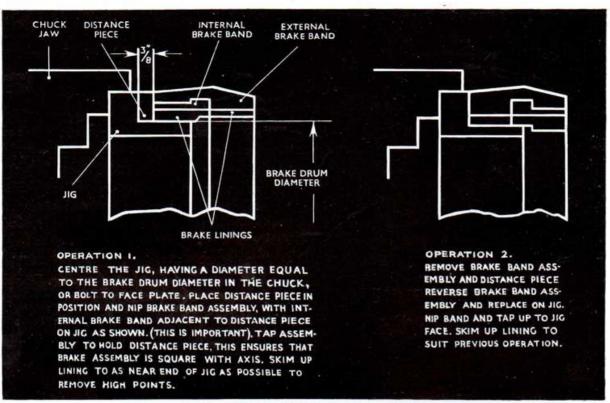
METHOD OF SKIMMING BRAKE LININGS.
